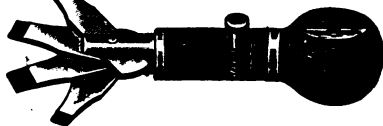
BILLINGS &amp; SPENCER POCKET SCREW DRIVER.
